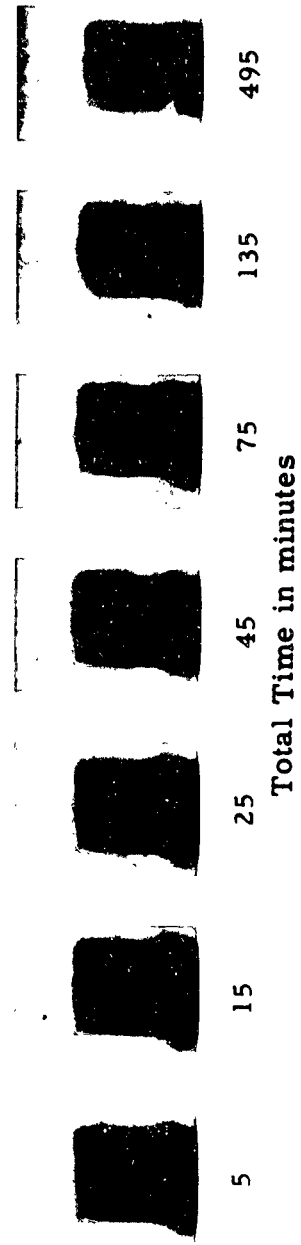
AUTORADIOGRAPHS OF 17 TOOTH REGROUND GEAR
